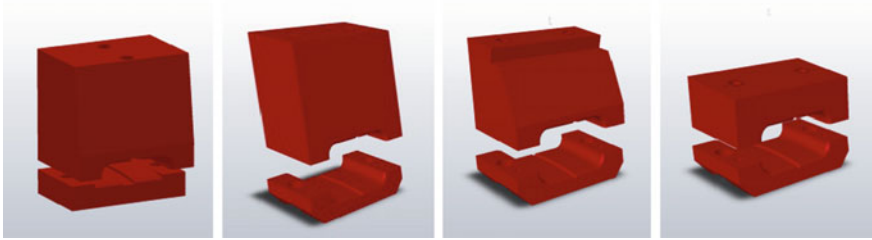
Shape sensor beam support structures (from left to right, the first is used to fixate the beam)
